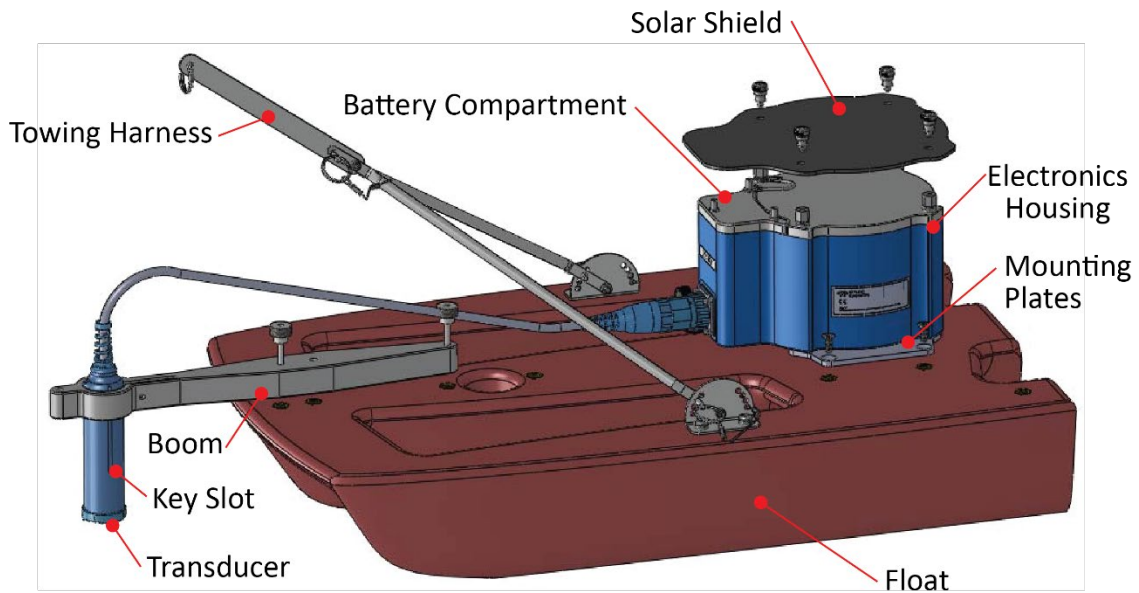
StreamPro ADCP Assembly – Boom in Extended Position
